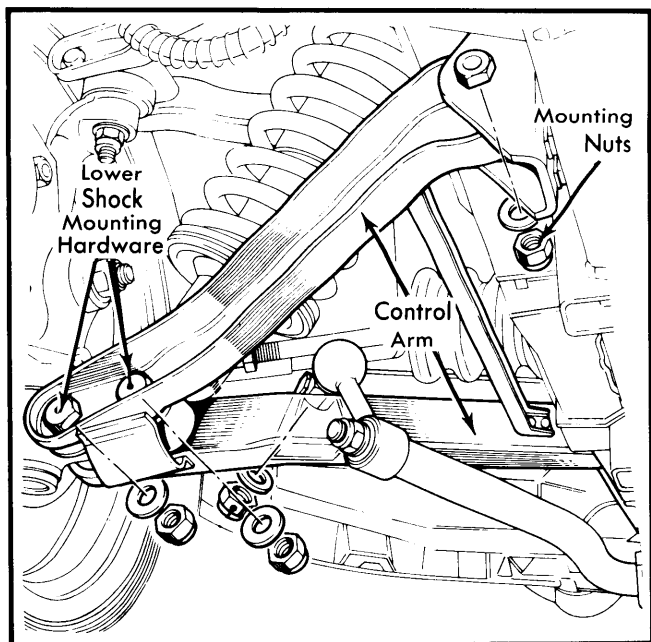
Nuts and Bolts to Remove Before Taking Out Lower Control Arm
